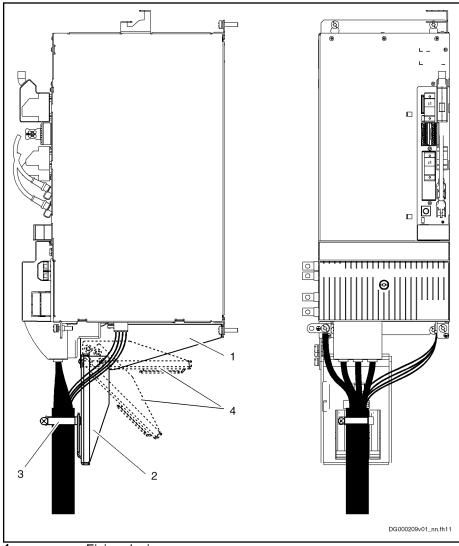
HAS02.1-002 at Bottom of Drive Controller HCS02.1E-W0054
